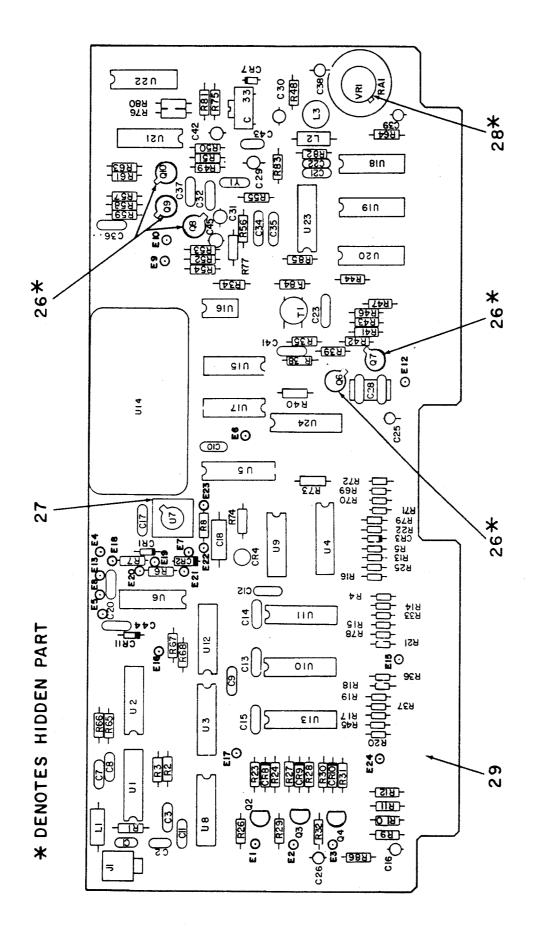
1st L.O. VCO Assembly 791629 (1A5A1A1)
